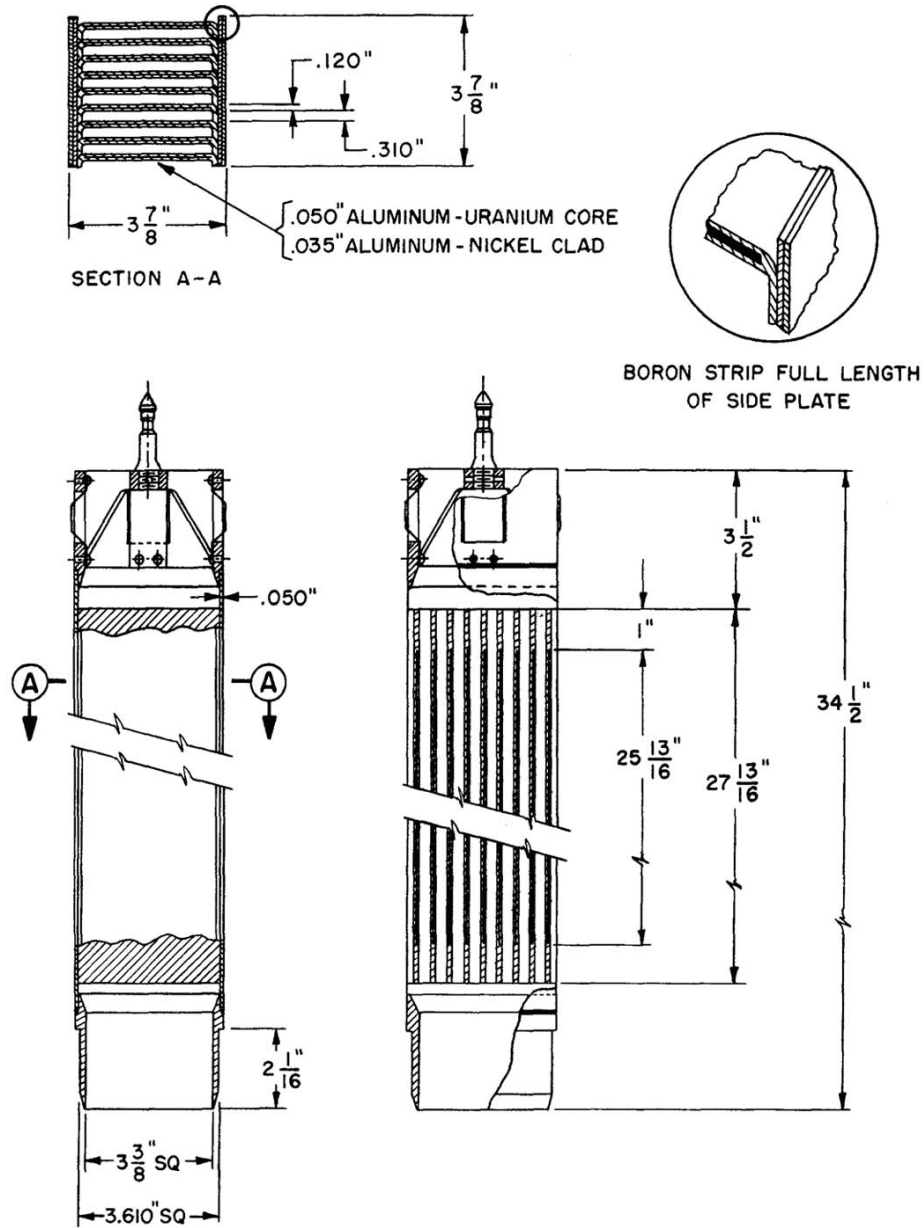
SL-1 Fuel Assembly Schematic (Ref. A-48)
